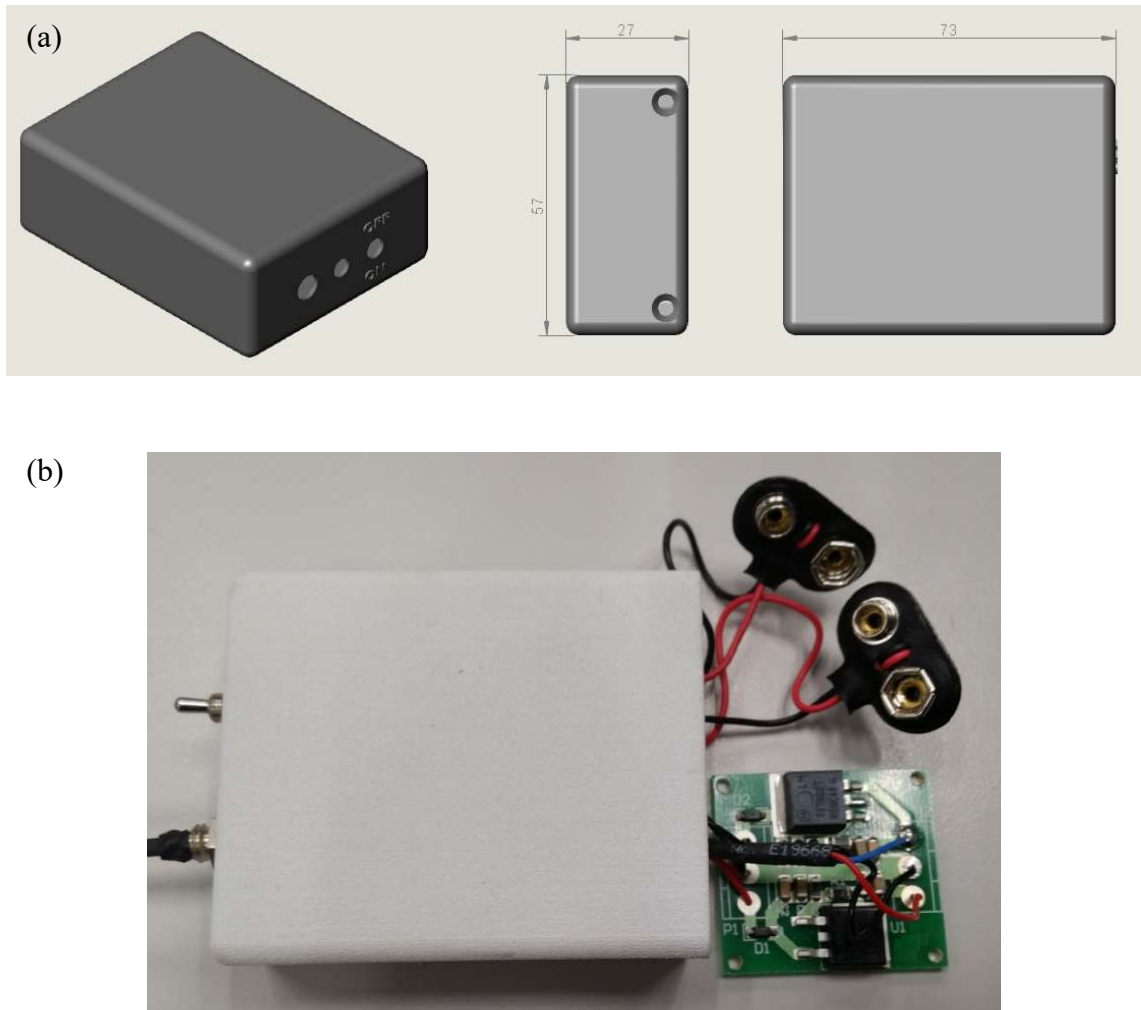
(a) SolidWorks drawings. (b) Final assembly of the stand-alone battery power supply.
